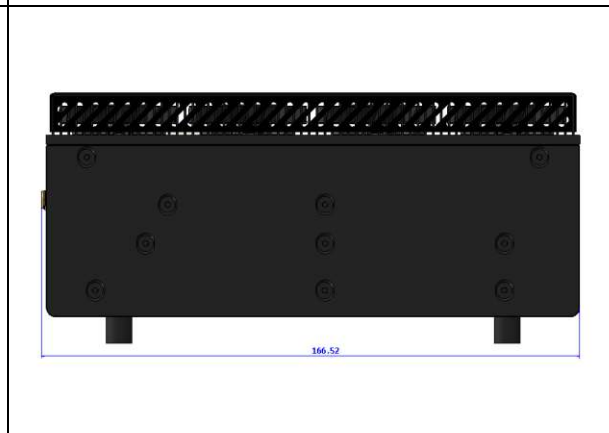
Nominal dimensions of the SBC-Nano chassis, side view.
